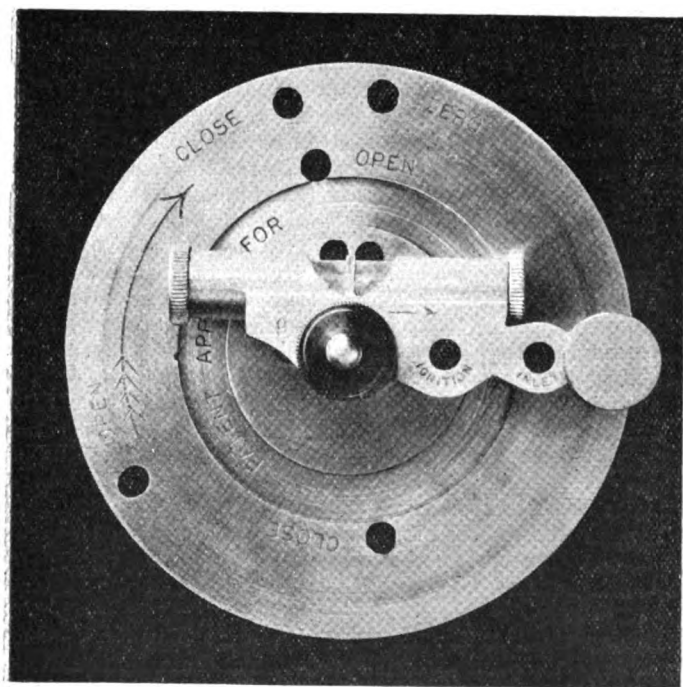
General View of Larrad's Petrol Motor Timer.
